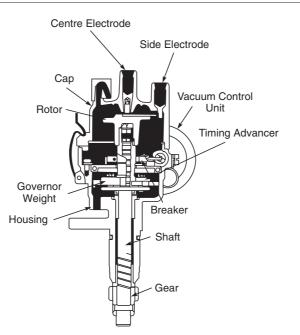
Internal Mechanism of Distributor (Courtesy: Maruti Udyog Ltd.)
